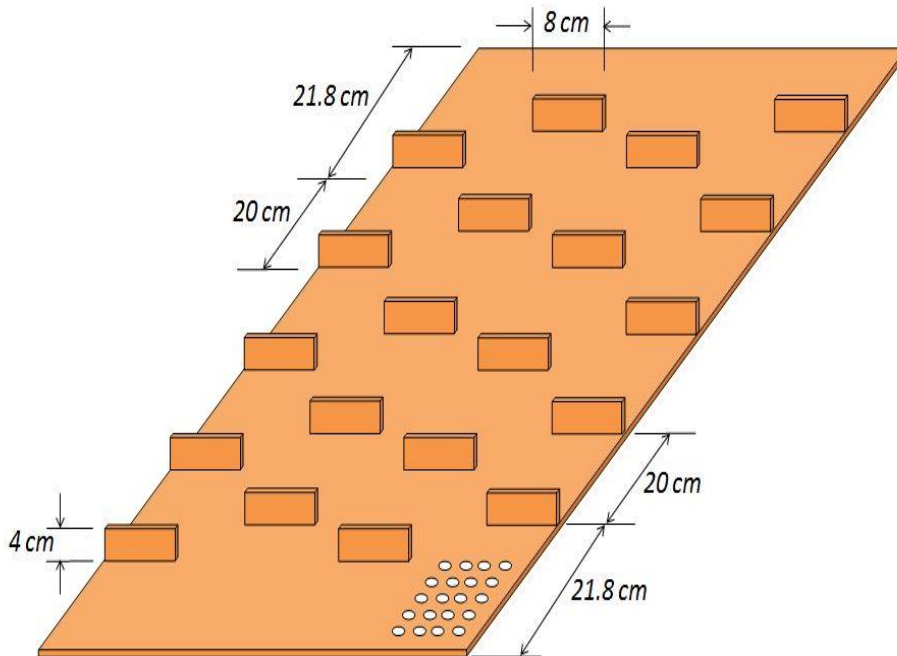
Horizontally finned absorbing surfaces dimensions
